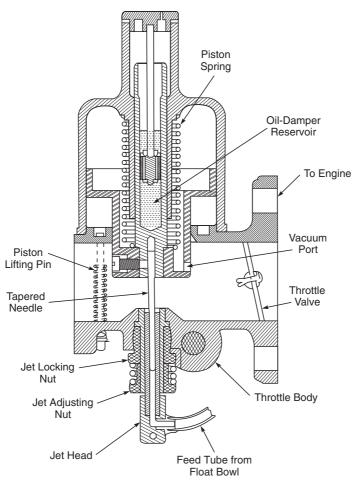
Sectional View of a S.U. (H.S. Type) Carburettor (Courtesy: Hindustan Motors Ltd.)
